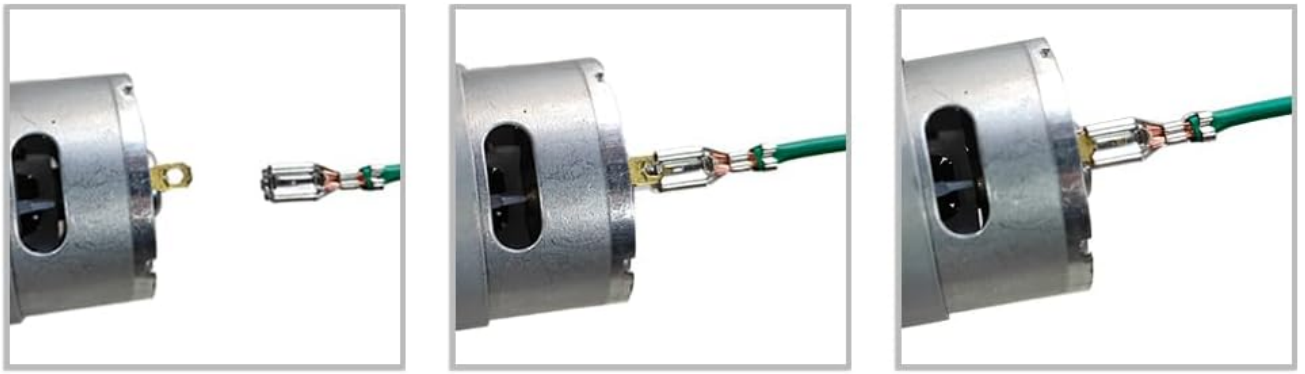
Welding-free wire connection method. Simply press the connection buckle for direct connection.
